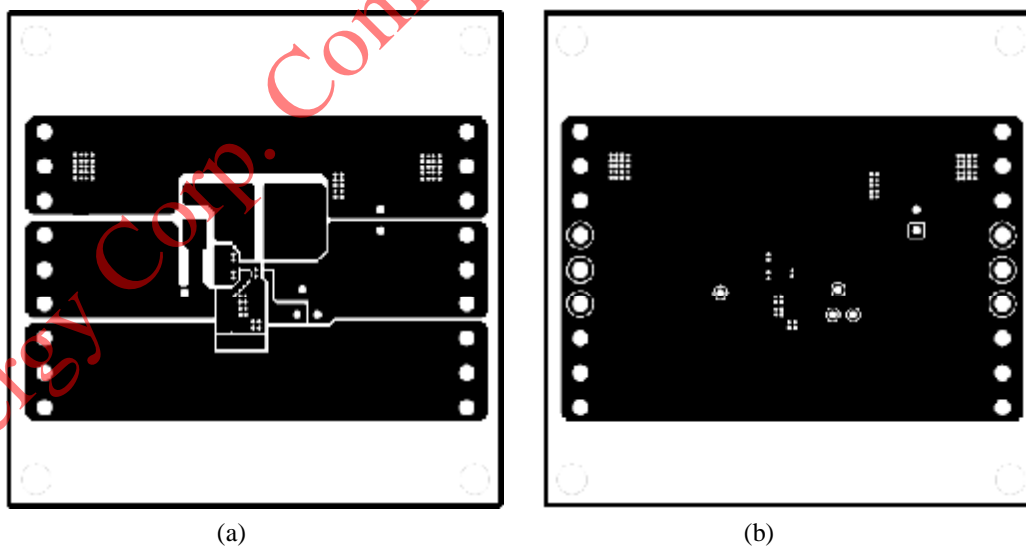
PCB Layout Plots: (a) top layer, (b) bottom layer
